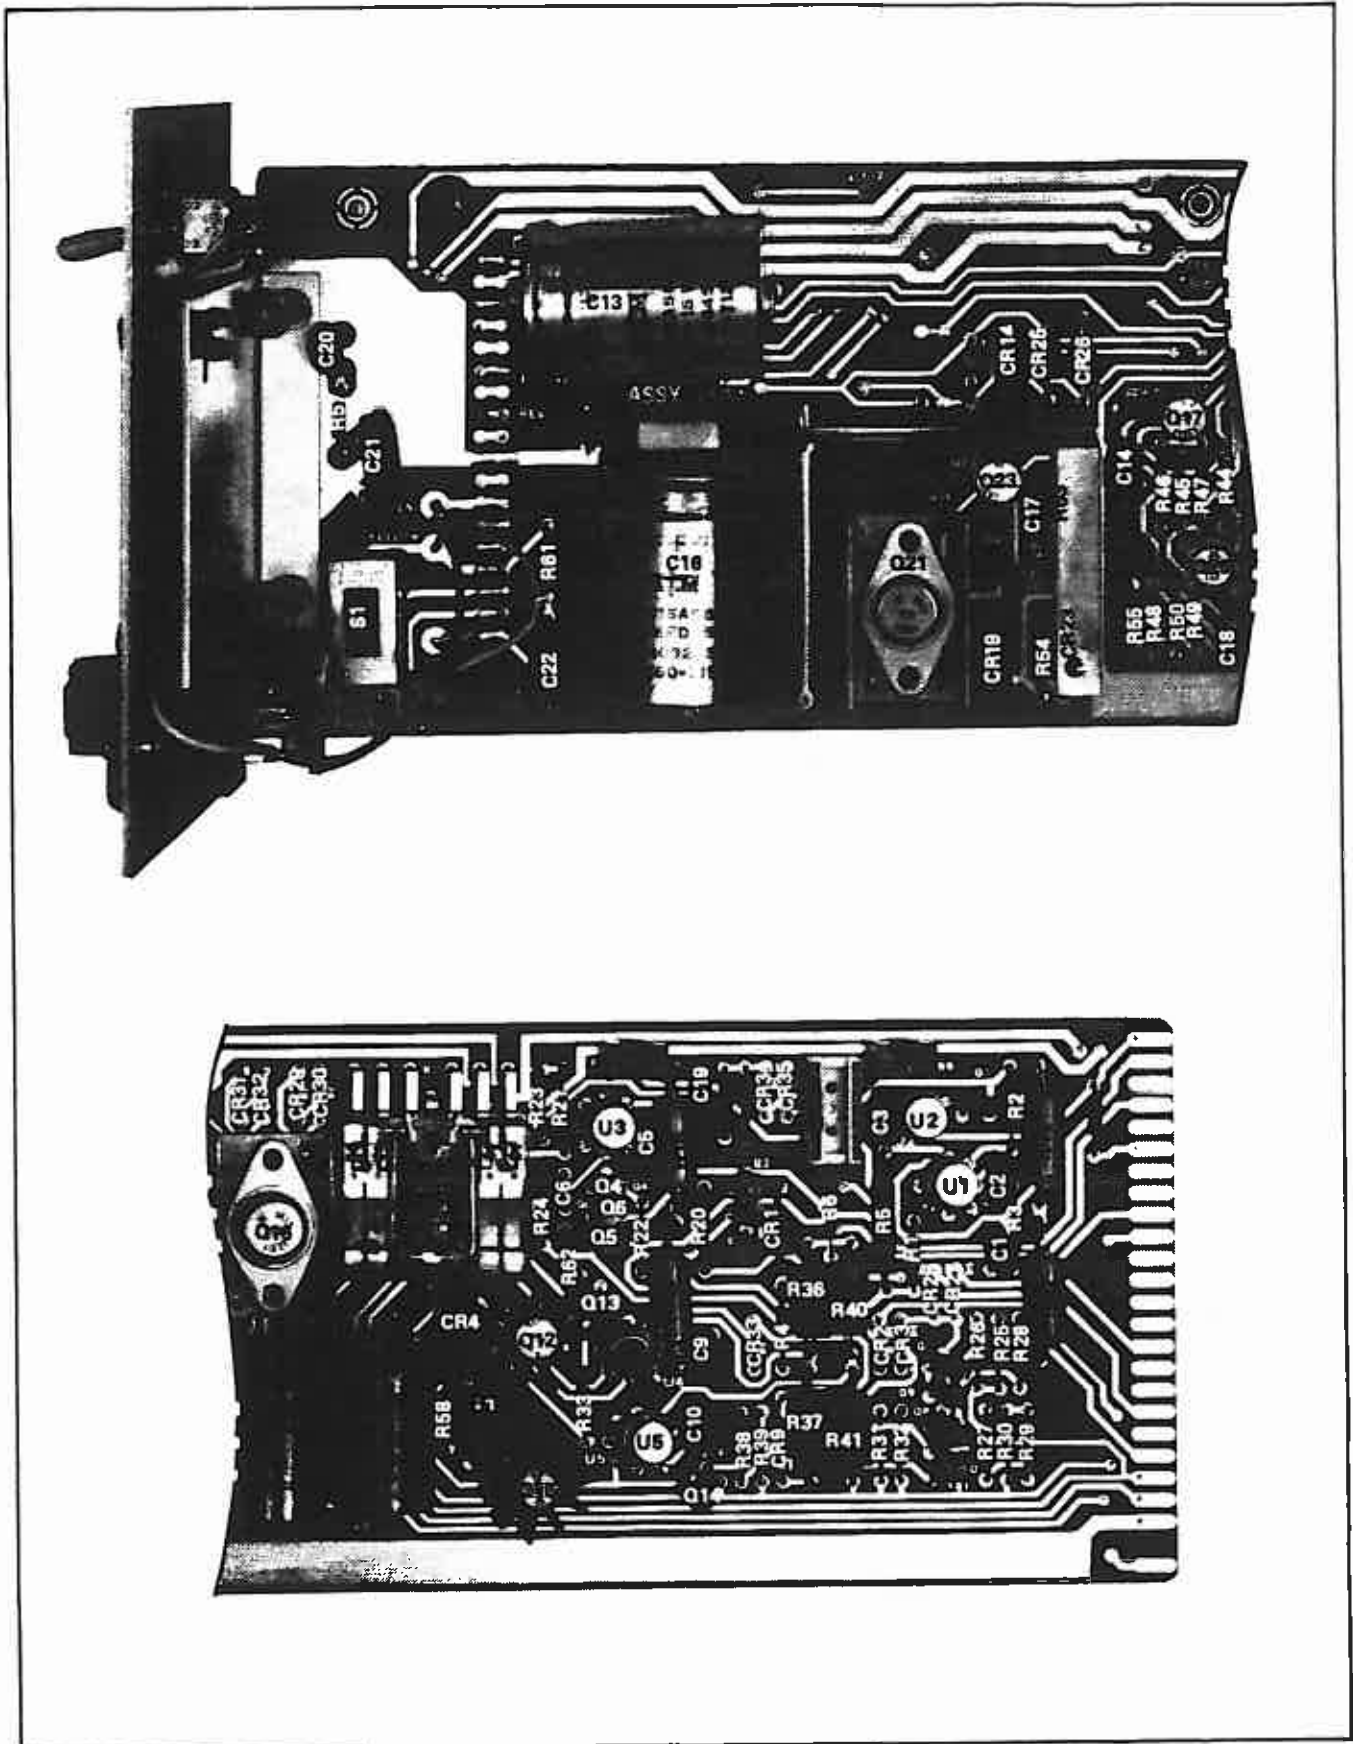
POWER SUPPLY PCB ASSEMBLY
